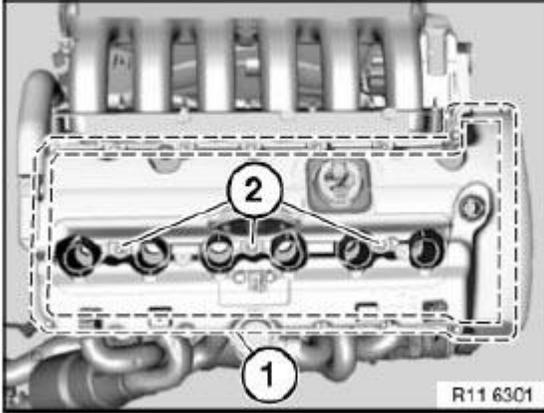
Identifying Threaded Pins And Screw Mounting Area
